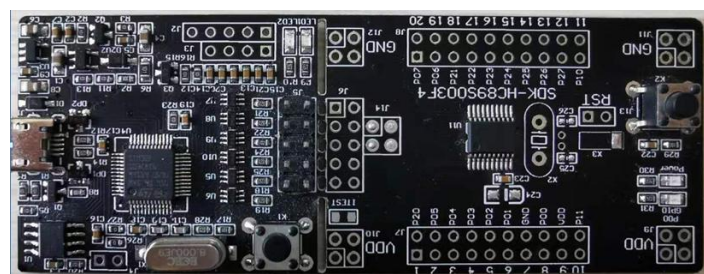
SDK Development board (see the pin diagram PCB board back)
